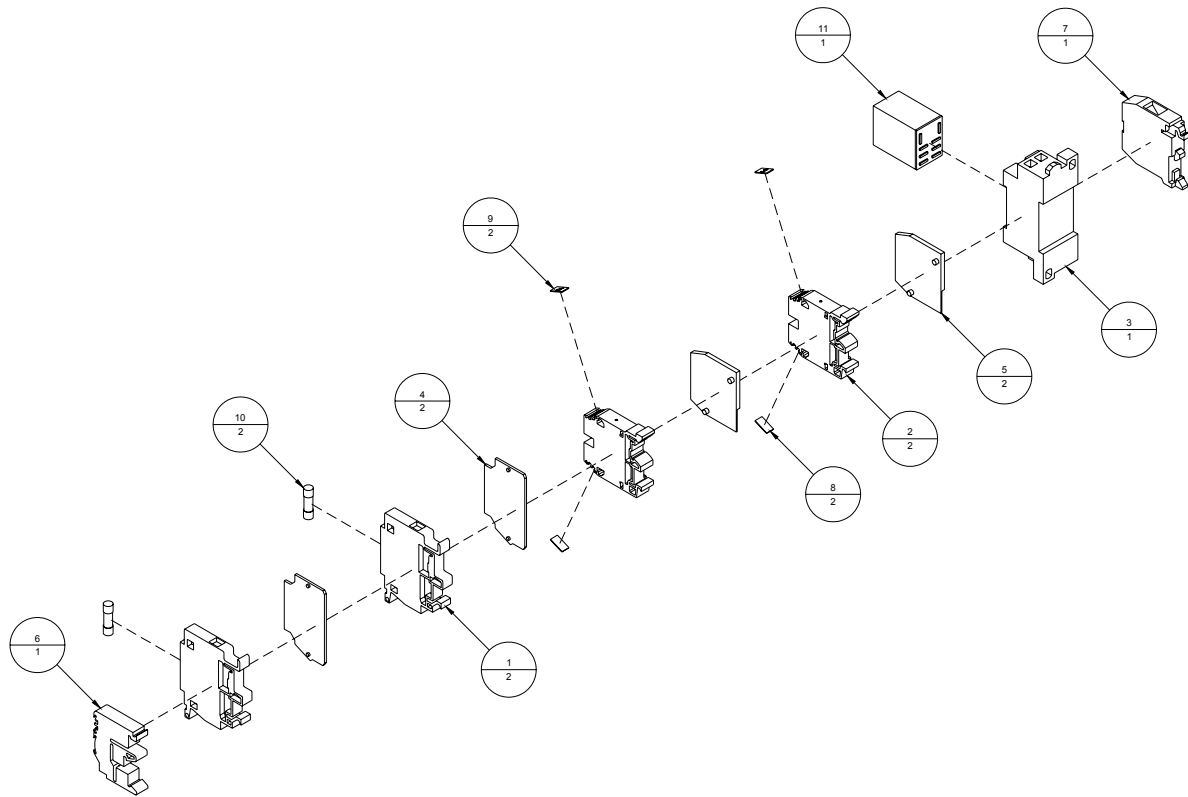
Terminal Block Assembly, 115 VAC, BK6OB (9102443A)
